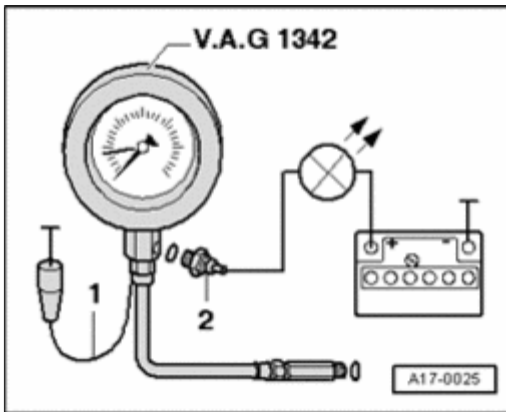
Connecting Oil Pressure Tester V.A.G 1342 To Hole For Oil Pressure Switch
